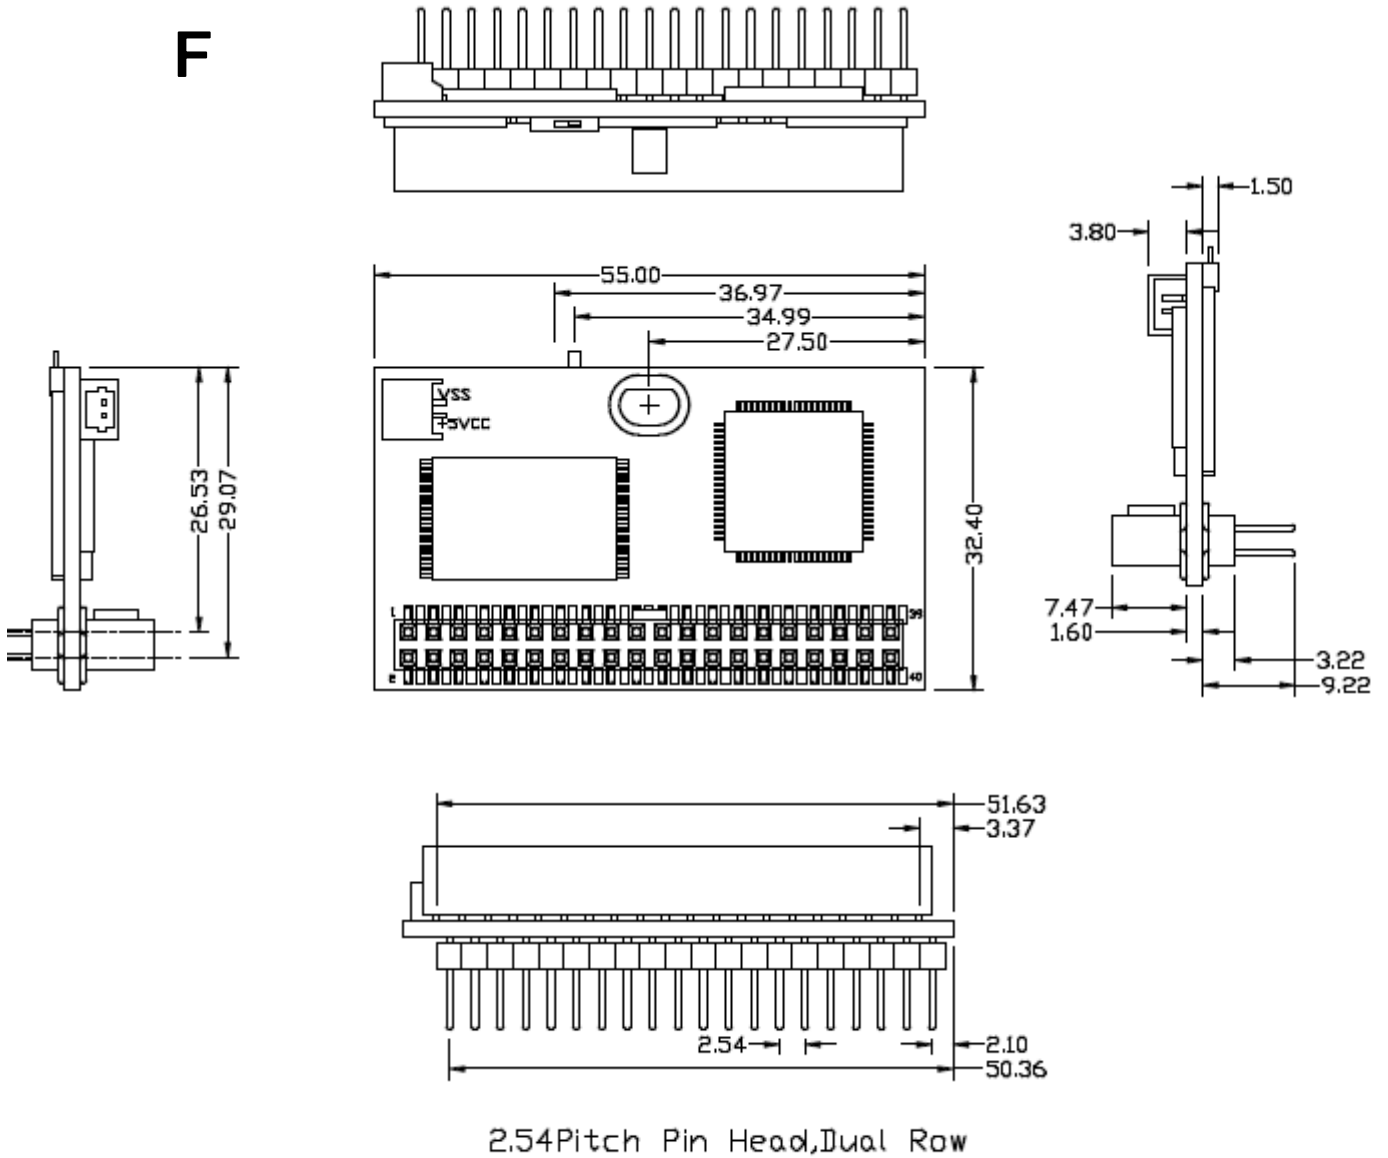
Mechanical Dimension of EDC1SE 40-pin(Horizontal Male/Female Type F)
